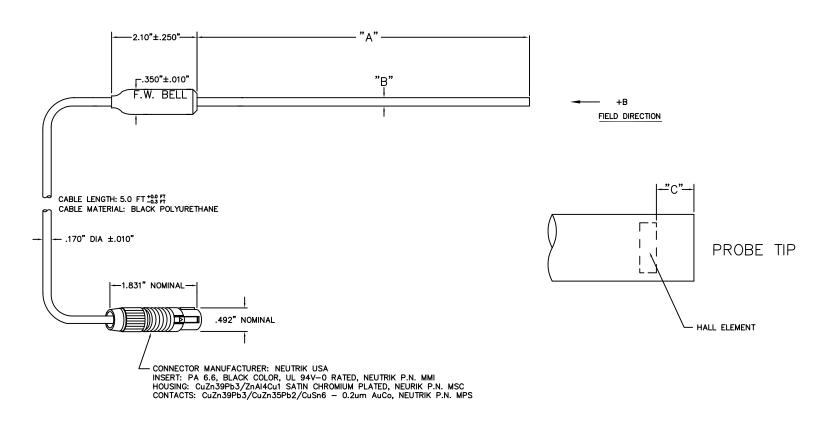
AXIAL PROBES (REF. (8) THRU (11))
